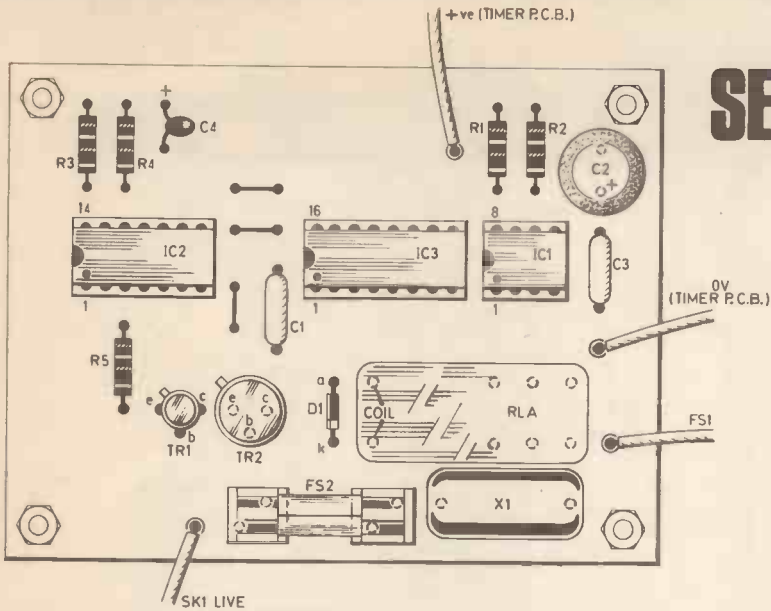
(opposite page) The component layout and full size track artwork for the timer/power supply printed circuit board. The four mounting holes are for securing the board to the p.c.b. brackets. These can be seen in the photograph of the prototype also shown.
